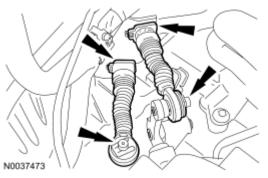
Locating Control Cables Courtesy of FORD MOTOR CO.
